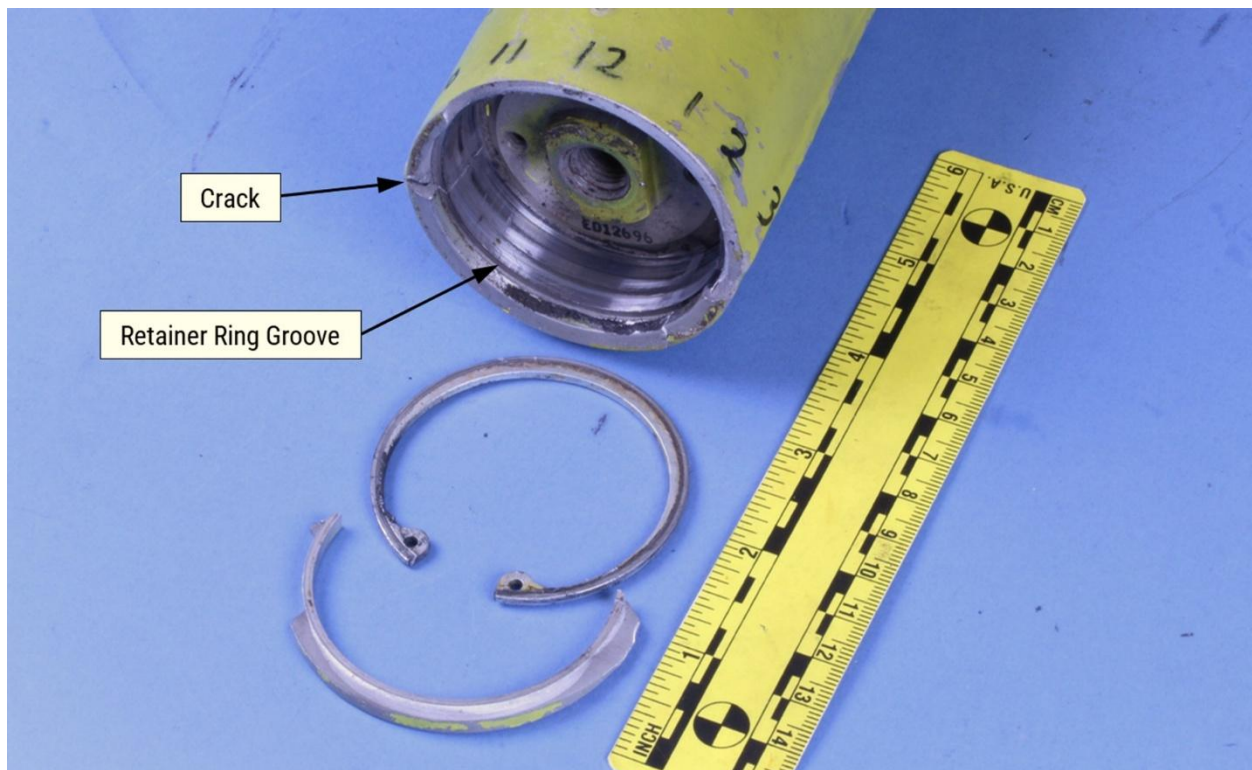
View into the actuator housing with the retainer ring groove and crack indicated (from NTSB case number ANC15LA048).
